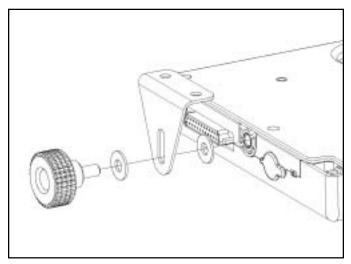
WASHERS AND THREADED KNOBS [SHOWN IN CB STYLE MOUNT (OVERHEAD) POSITION]
